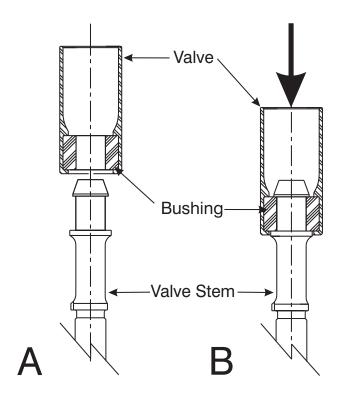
Press Valve and Bushing onto Valve Stem.
